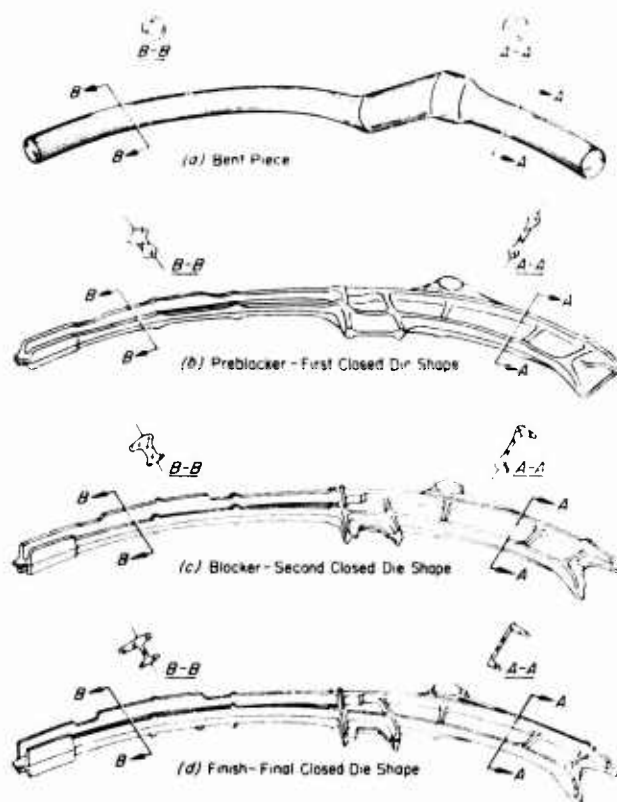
FORGING SEQUENCE FOR ALUMINUM BULKHEAD FORGING
